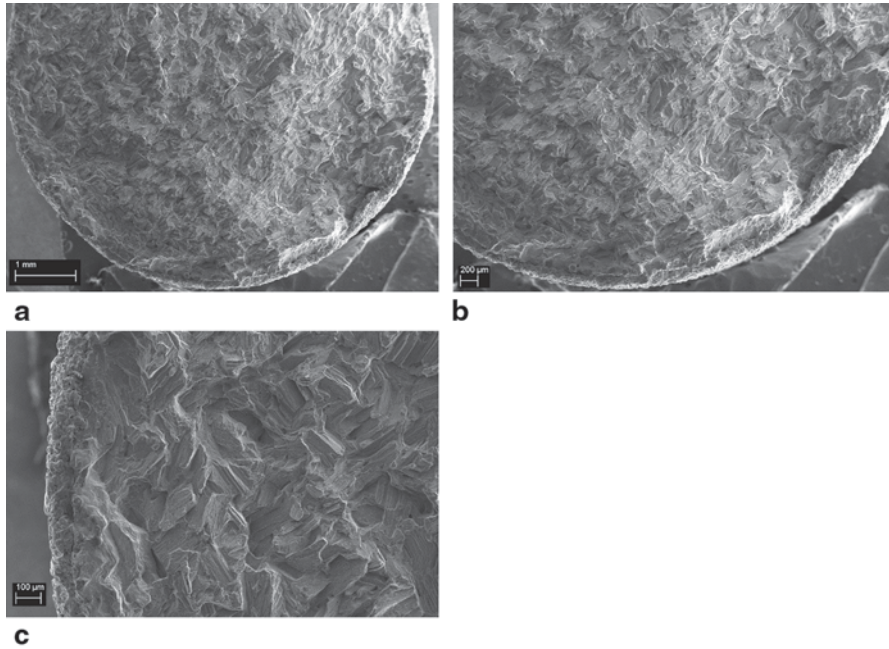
Fracture surface of stress-relieved/coated specimen with the nominal stress of 188 MPa; a and b crack initiation region, c coating layer. (Mahmoudi 2012)
